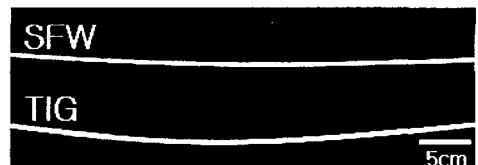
Welding distortion. (5052 Al, 1.5mmt)
